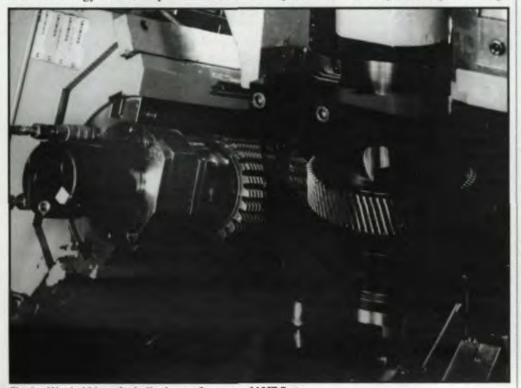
Wet hobbing of a helical gear. Courtesy of LMT-Fette.
